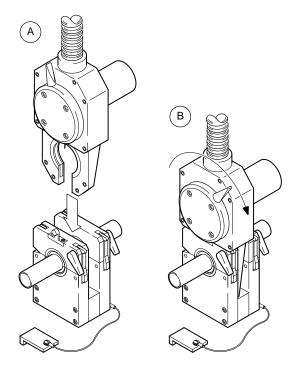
Mating the Weld Head to the Fixture Block
